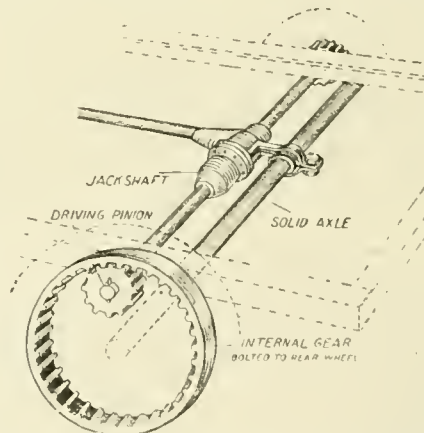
Internal-gear drive. A jackshaft pinions with two large meshed wheels on the back axle
